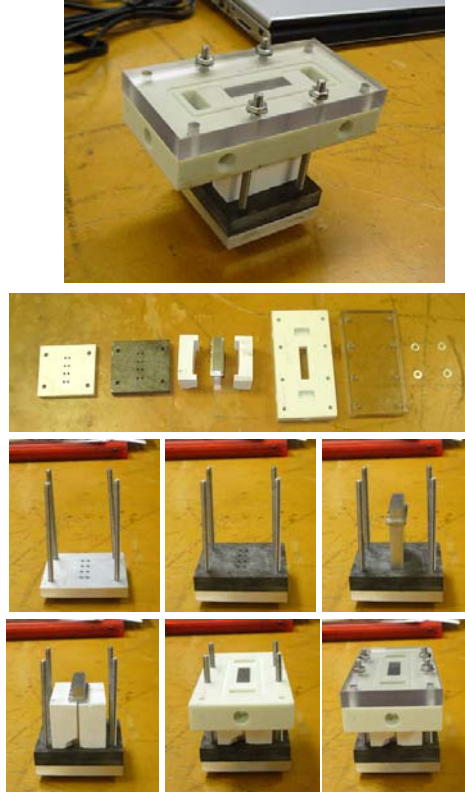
Detailed pictures of the final test assembly and the assembly process are shown above. The top center picture is the final test assembly. The second row is all pieces used in the set-up. The third and fourth rows are progressive assembly pictures, starting at the third row far left, to the fourth row far right.
